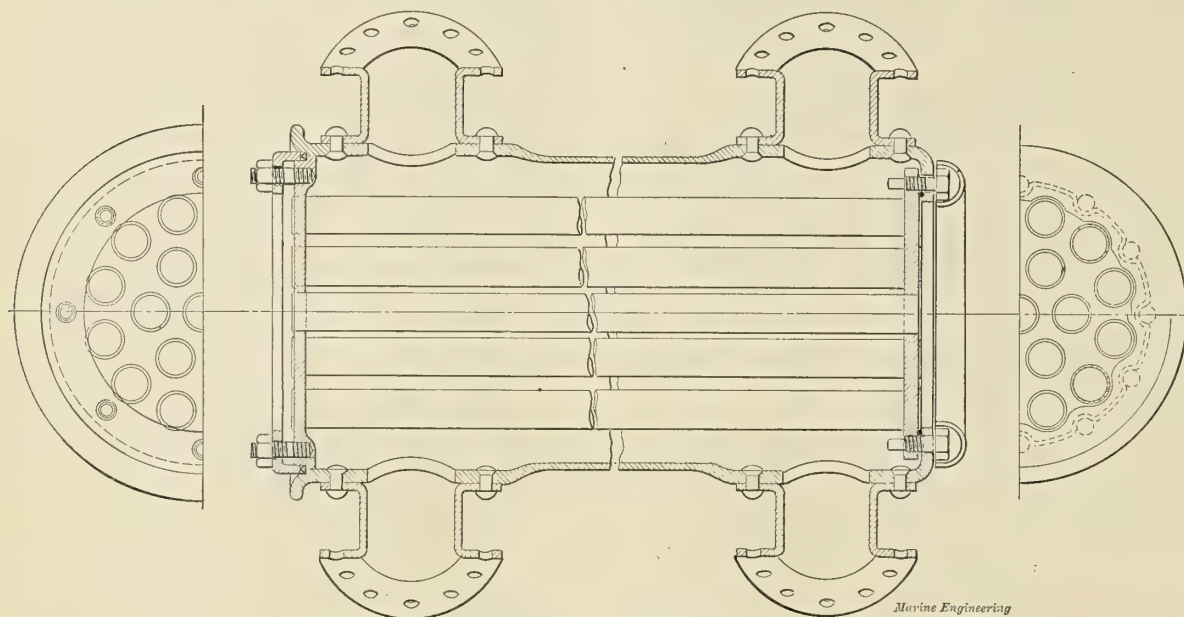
UNIT OF COWLEY &amp; COOPER FIRE TUBE BOILER.
